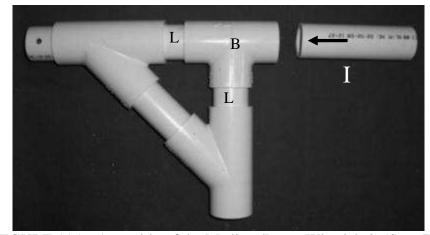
Assembly of the Medium/Large Wheelchair (Step 7).
